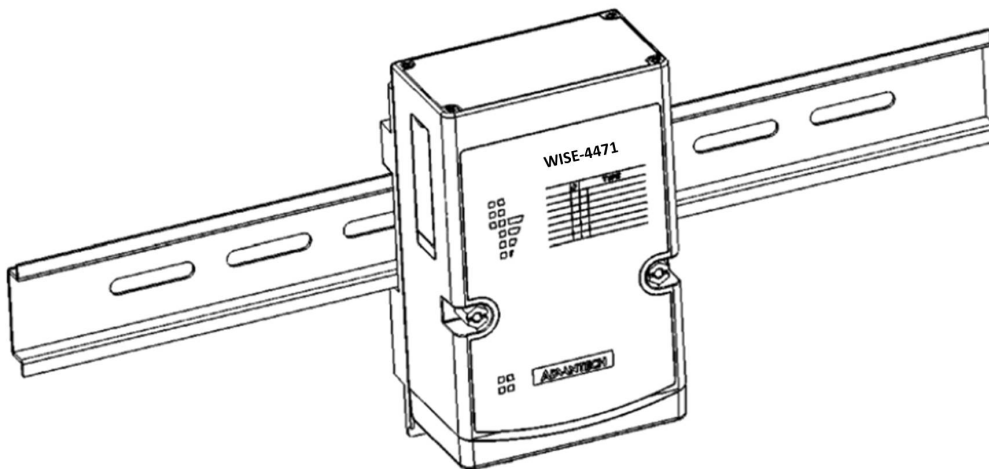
WISE-4471 DIN Rail Mounting (front)
